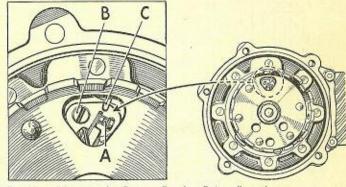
, until Fig. 19. Adjusting the Contact Breaker Points (Lucas).
